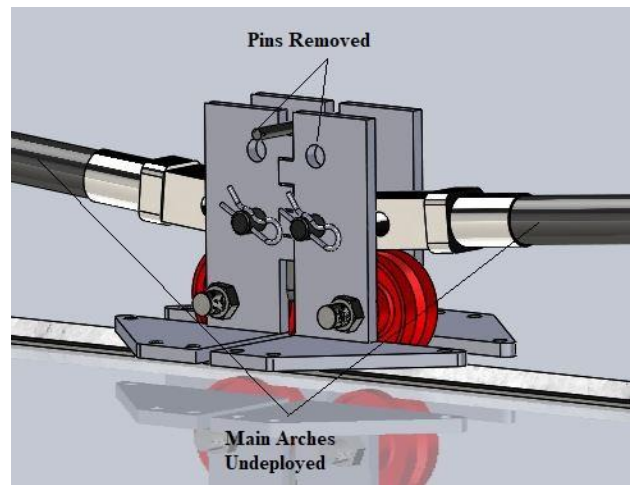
Open Base Assembly for Launch Vehicle Enclosure
